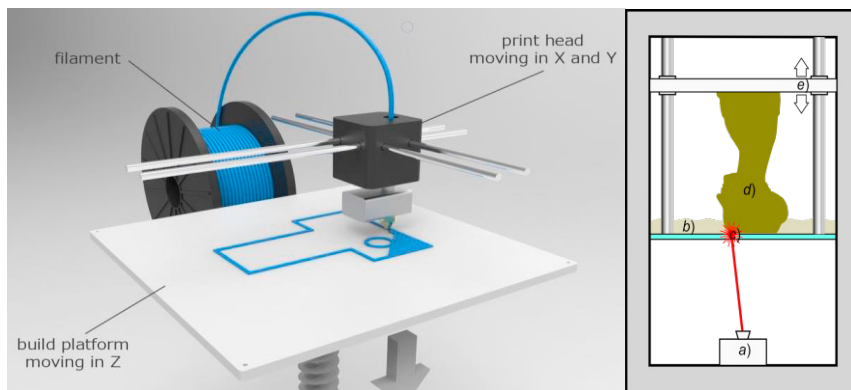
(left) Fused deposition modeling printing scheme; (right) stereolithography printing scheme
